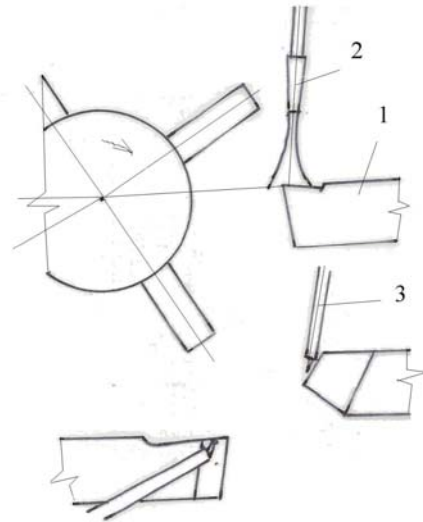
Scheme of outer heating of tool. 1 - tool, 2 - heater, 3 - thermocouple
